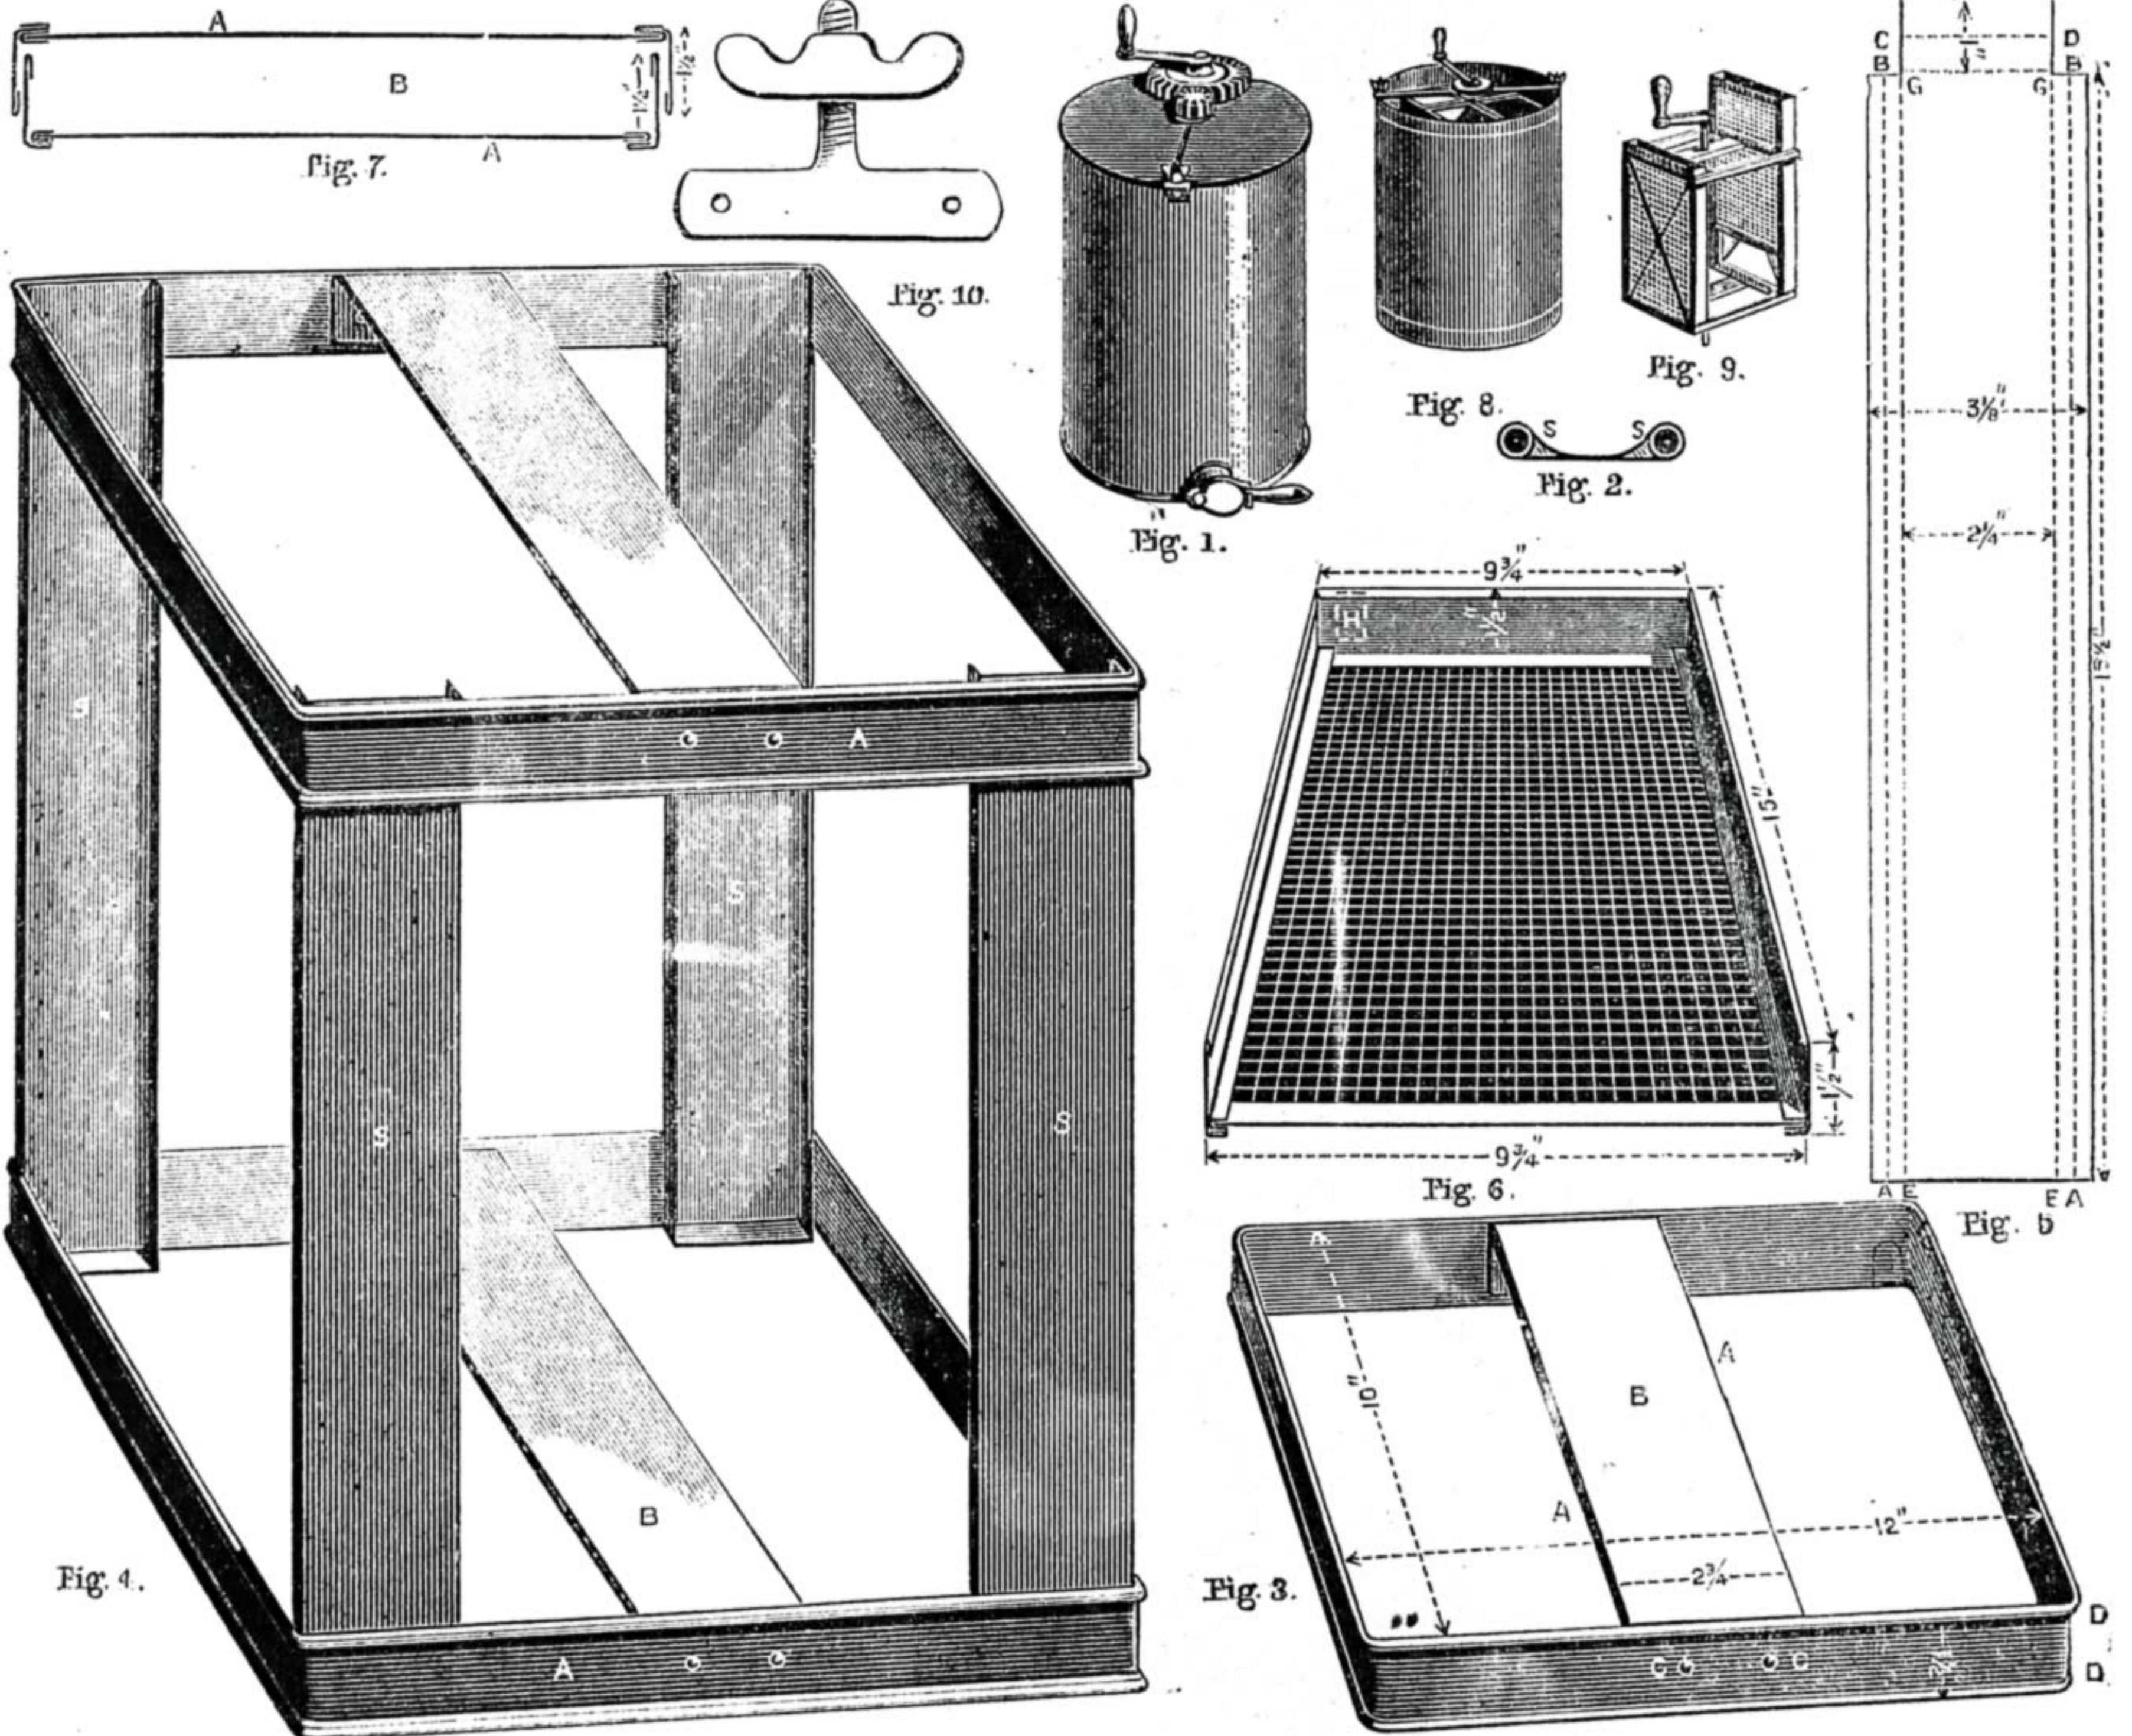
General View of Extractor. Fig. 2.—Wired Edge soldered to keep out Dirt—S, Solder. Fig. 3.—Rectangular Band and Bridge—A, Wired Edge; B, Bridge; C, Rivets; D, Edge wired all round. Fig. 4.—Bands (A), Slides (S), and Bridges (B). Fig. 5.—Pattern of Slide. Fig. 6.—Half of Comb Basket—H, Hole for Frame End. Fig. 7.—Section through Comb Basket—A, Wire Netting bound round with Tin; B, Space for Comb. Fig. 8.—Extractor showing Baskets in place. Fig. 9.—Frames, Baskets, and Handle. Fig. 10.—Bolt for Cross-bar.
